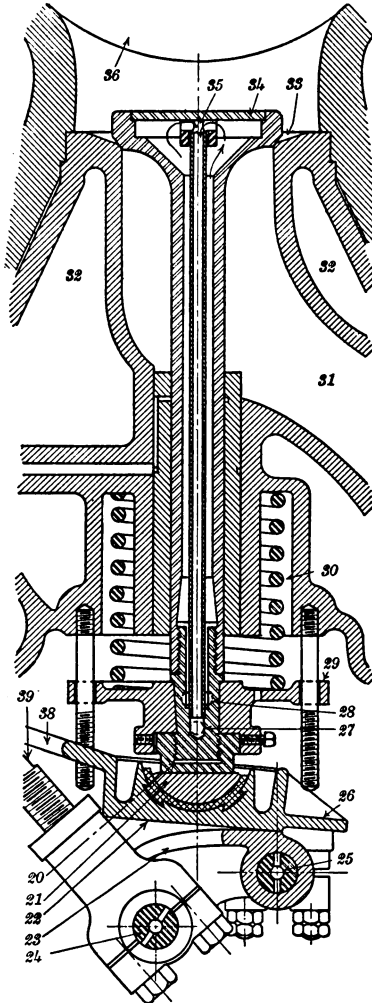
WATER-COOLED EXHAUST VALVE, WESTINGHOUSE GAS ENGINE
